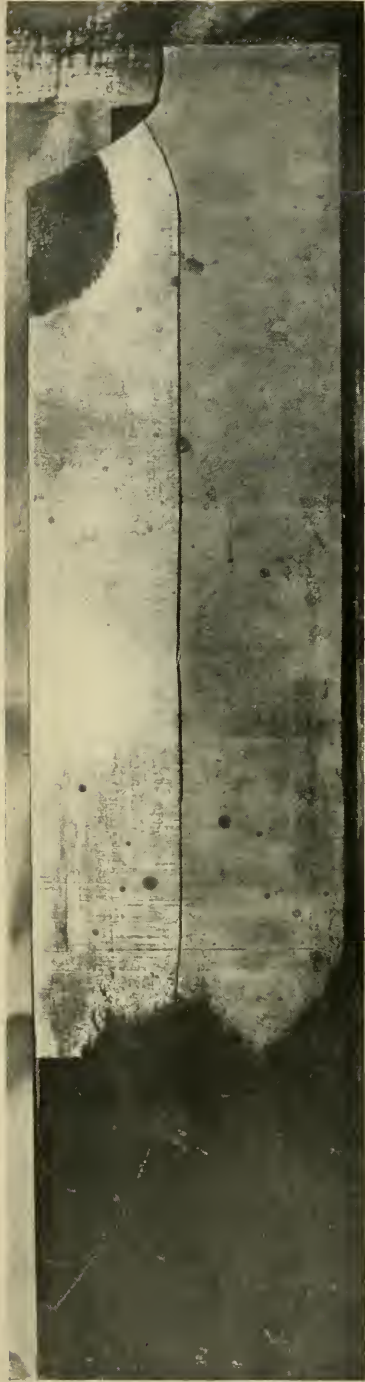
"Moon-Shaped" Fracture in Base of Rail. Fracture made in the testing machine on the line of a streak, in continuation of one which occurred in the track.
